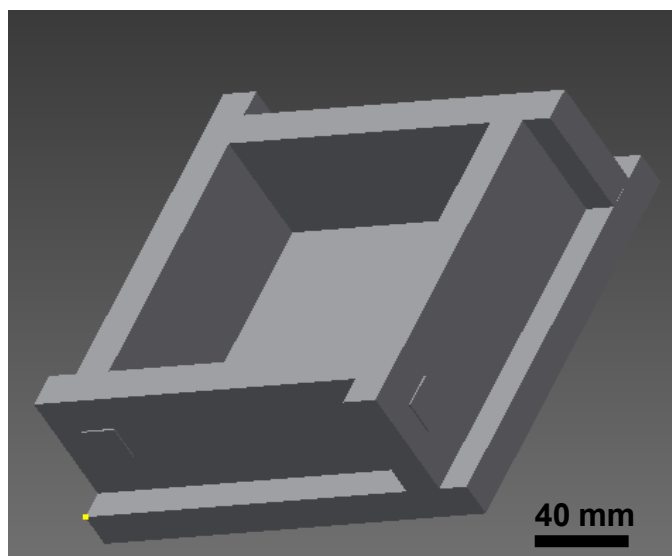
Assembly design of the acrylic box drawn using Autodesk Inventor
